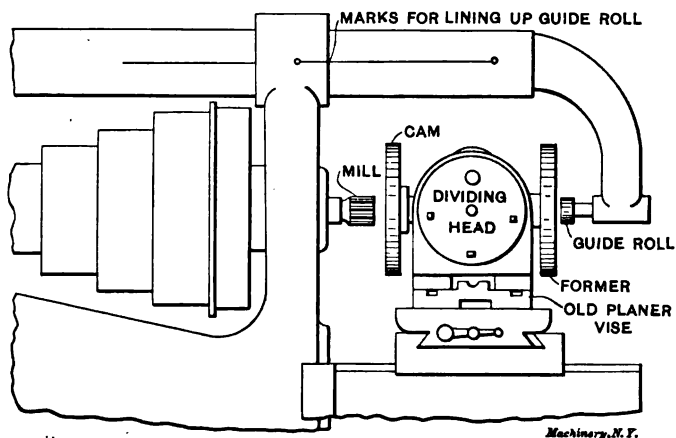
Inexpensive Fixture for Milling Plate Cams to Match a Former.
